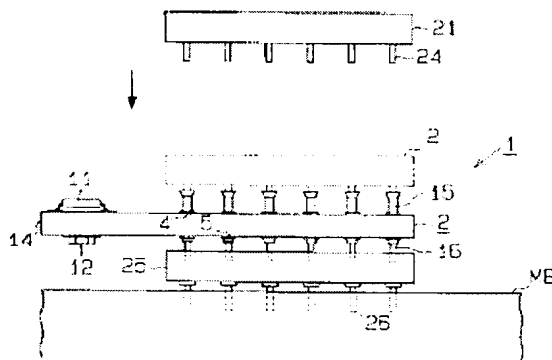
The important section expanded sectional view for explaining the manufacturing method of the conversion module in the former.
